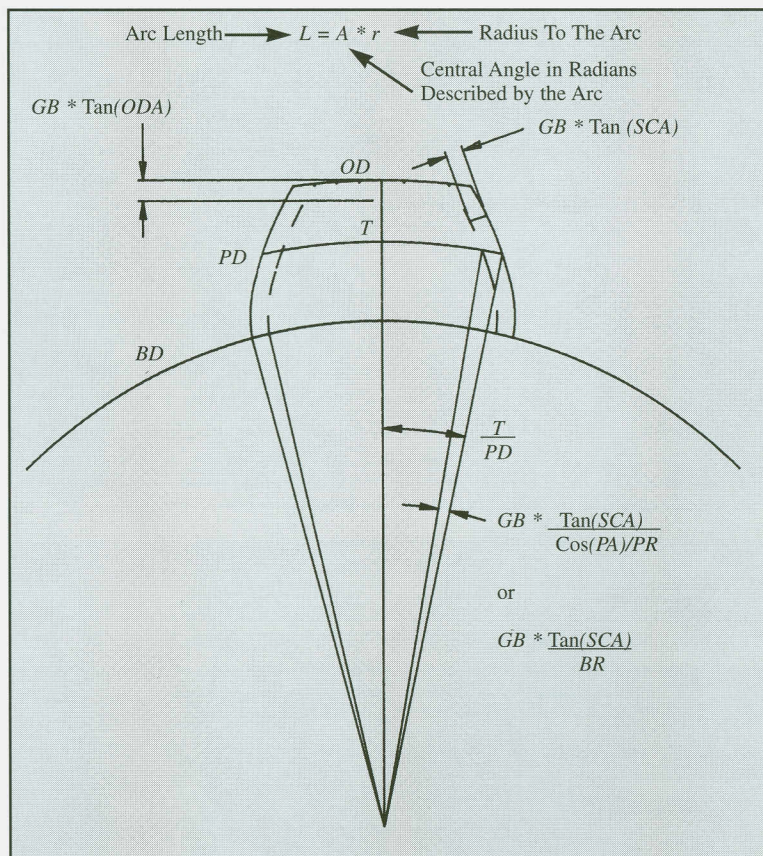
Angles involved in finding the new tooth thickness after a grind back.
